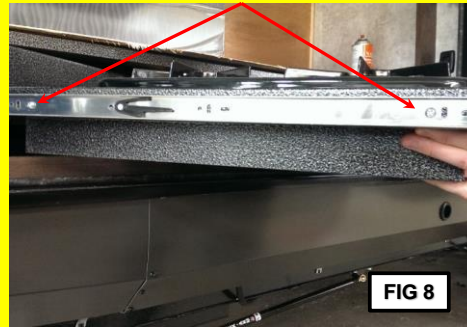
Disassemble male portion of drawer glide assembly by unscrewing the 2 self tapping screws.
